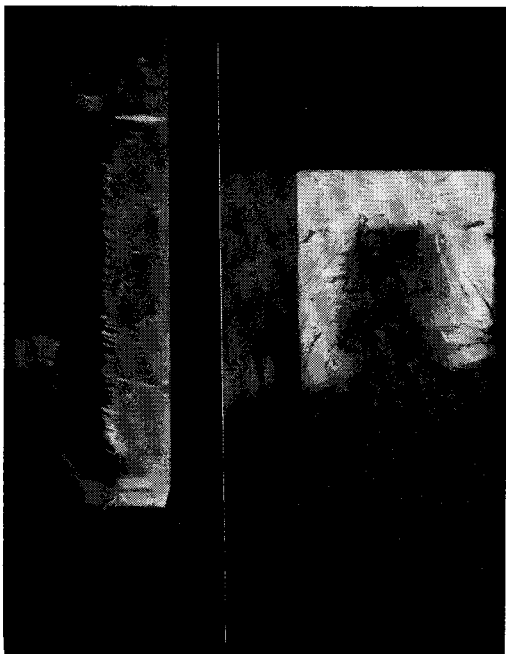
Fractured surfaces of polystyrene bending creep specimens.
